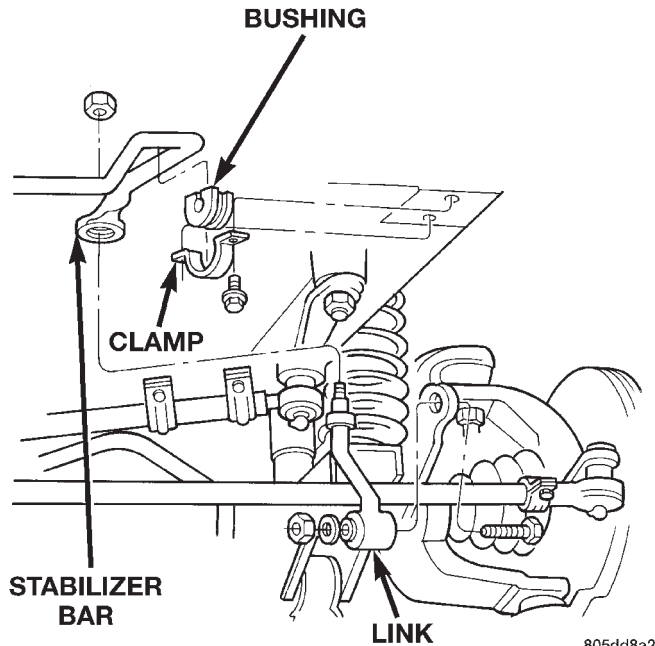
Bushing RemovalFig. 6 Bushing Installation
